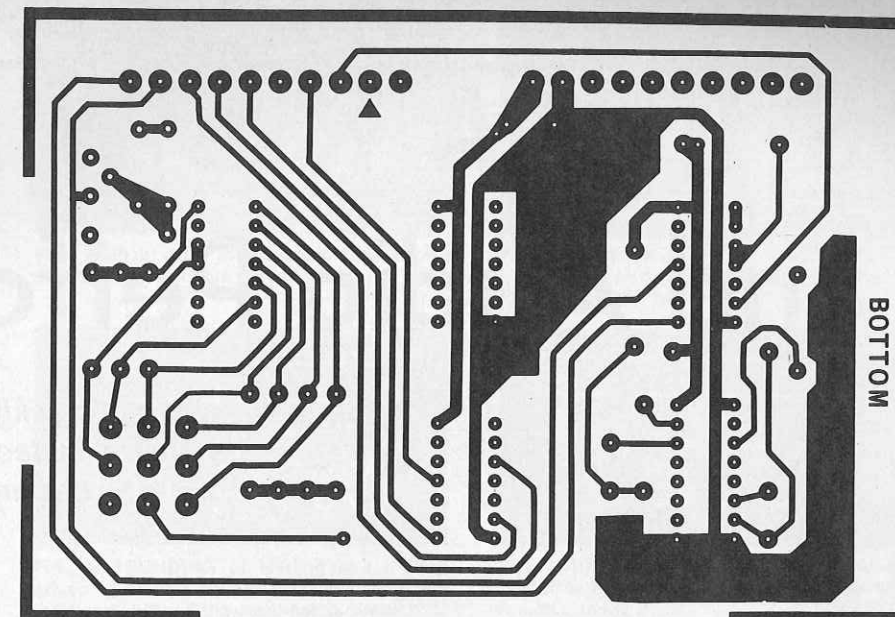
FOIL PATTERN of foil side of double-sided board shown full size.
